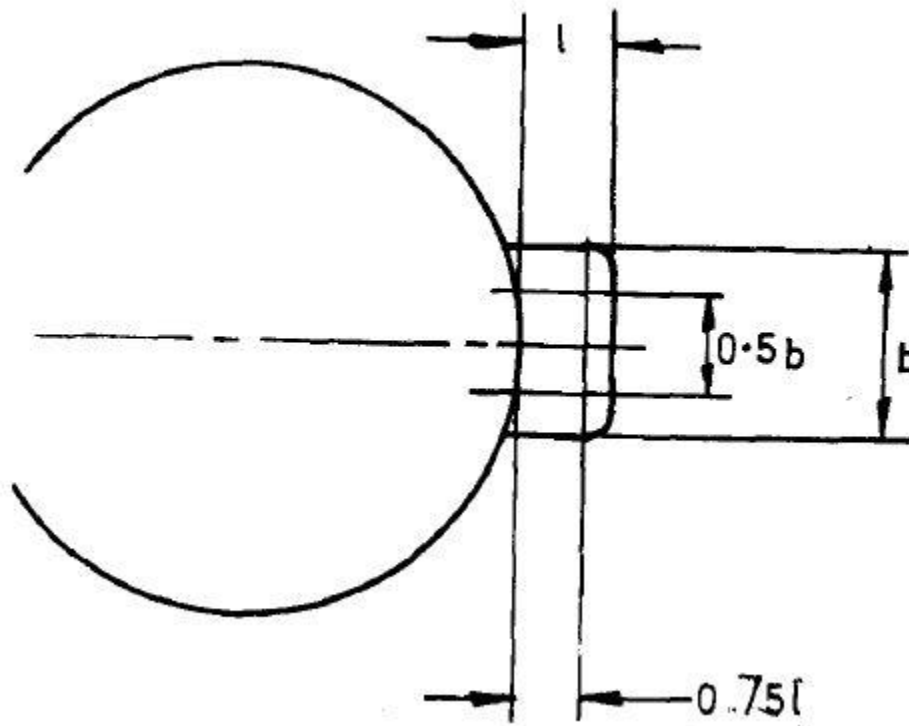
B Points for Temperature Measurement - Solid Flange Handle
